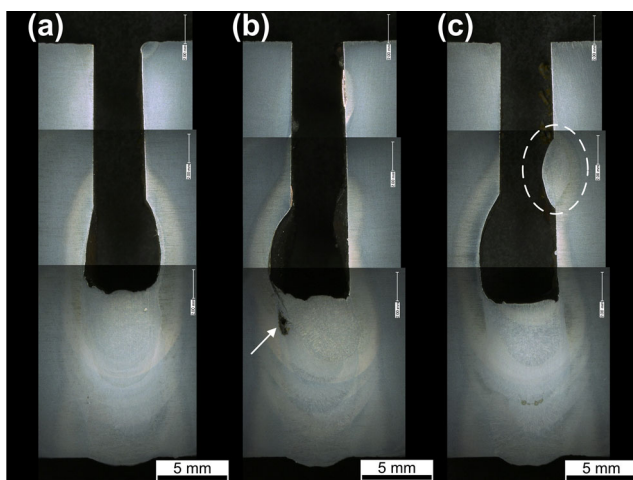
Effect of the laser-wire overlapping on multi-pass laser welding with filler wire addition: a 1 mm, b 3 mm, and c 5 mm
